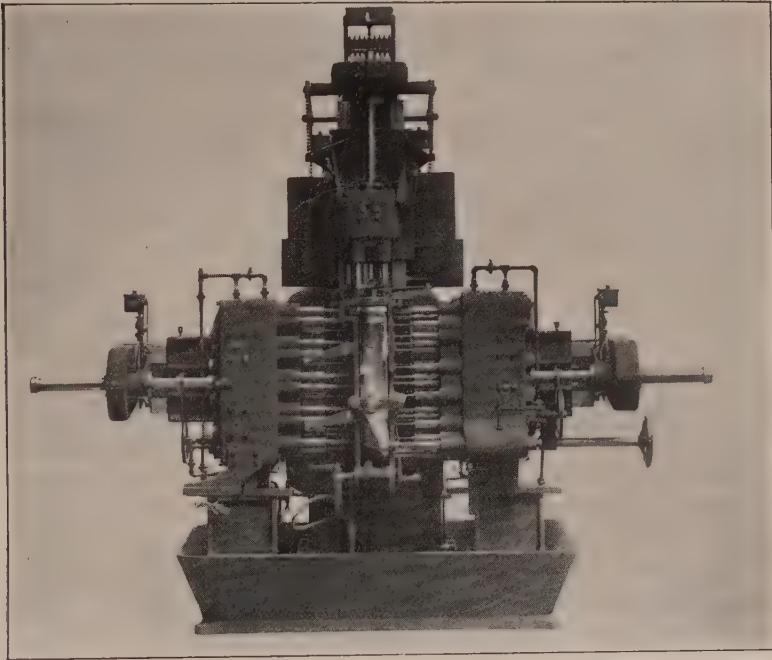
A Typical Special Automatic Machine designed for Drilling a Particular Piece of Work; built by the Foote-Burt Co.
